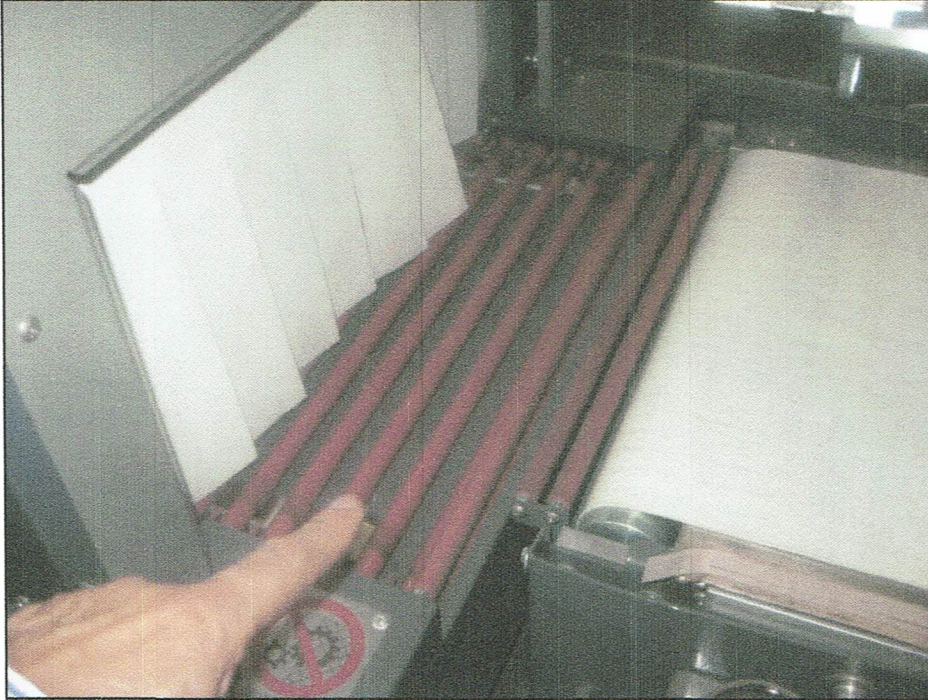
XEKL 455 MT: Transfer between shrink wrap platform and heating tunnel conveyor
